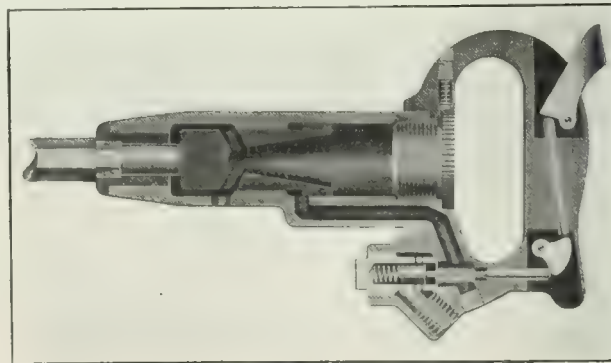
Sectional View of the Pittsburgh Chipping Hammer.
